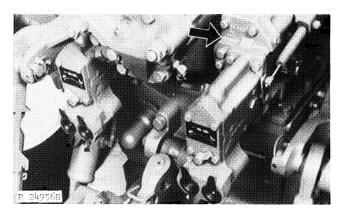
Directional Control Valve - Tractors with Rockshaft
